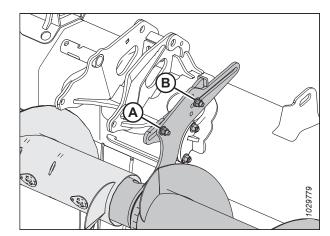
Initial Position of Adjustable Mounts – Three-Piece Auger
